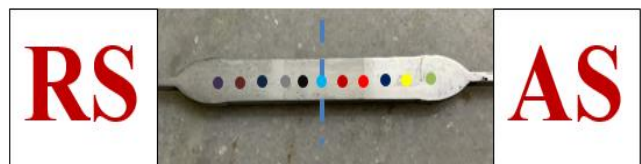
Specimen employed for examination of hardness on the weldment
